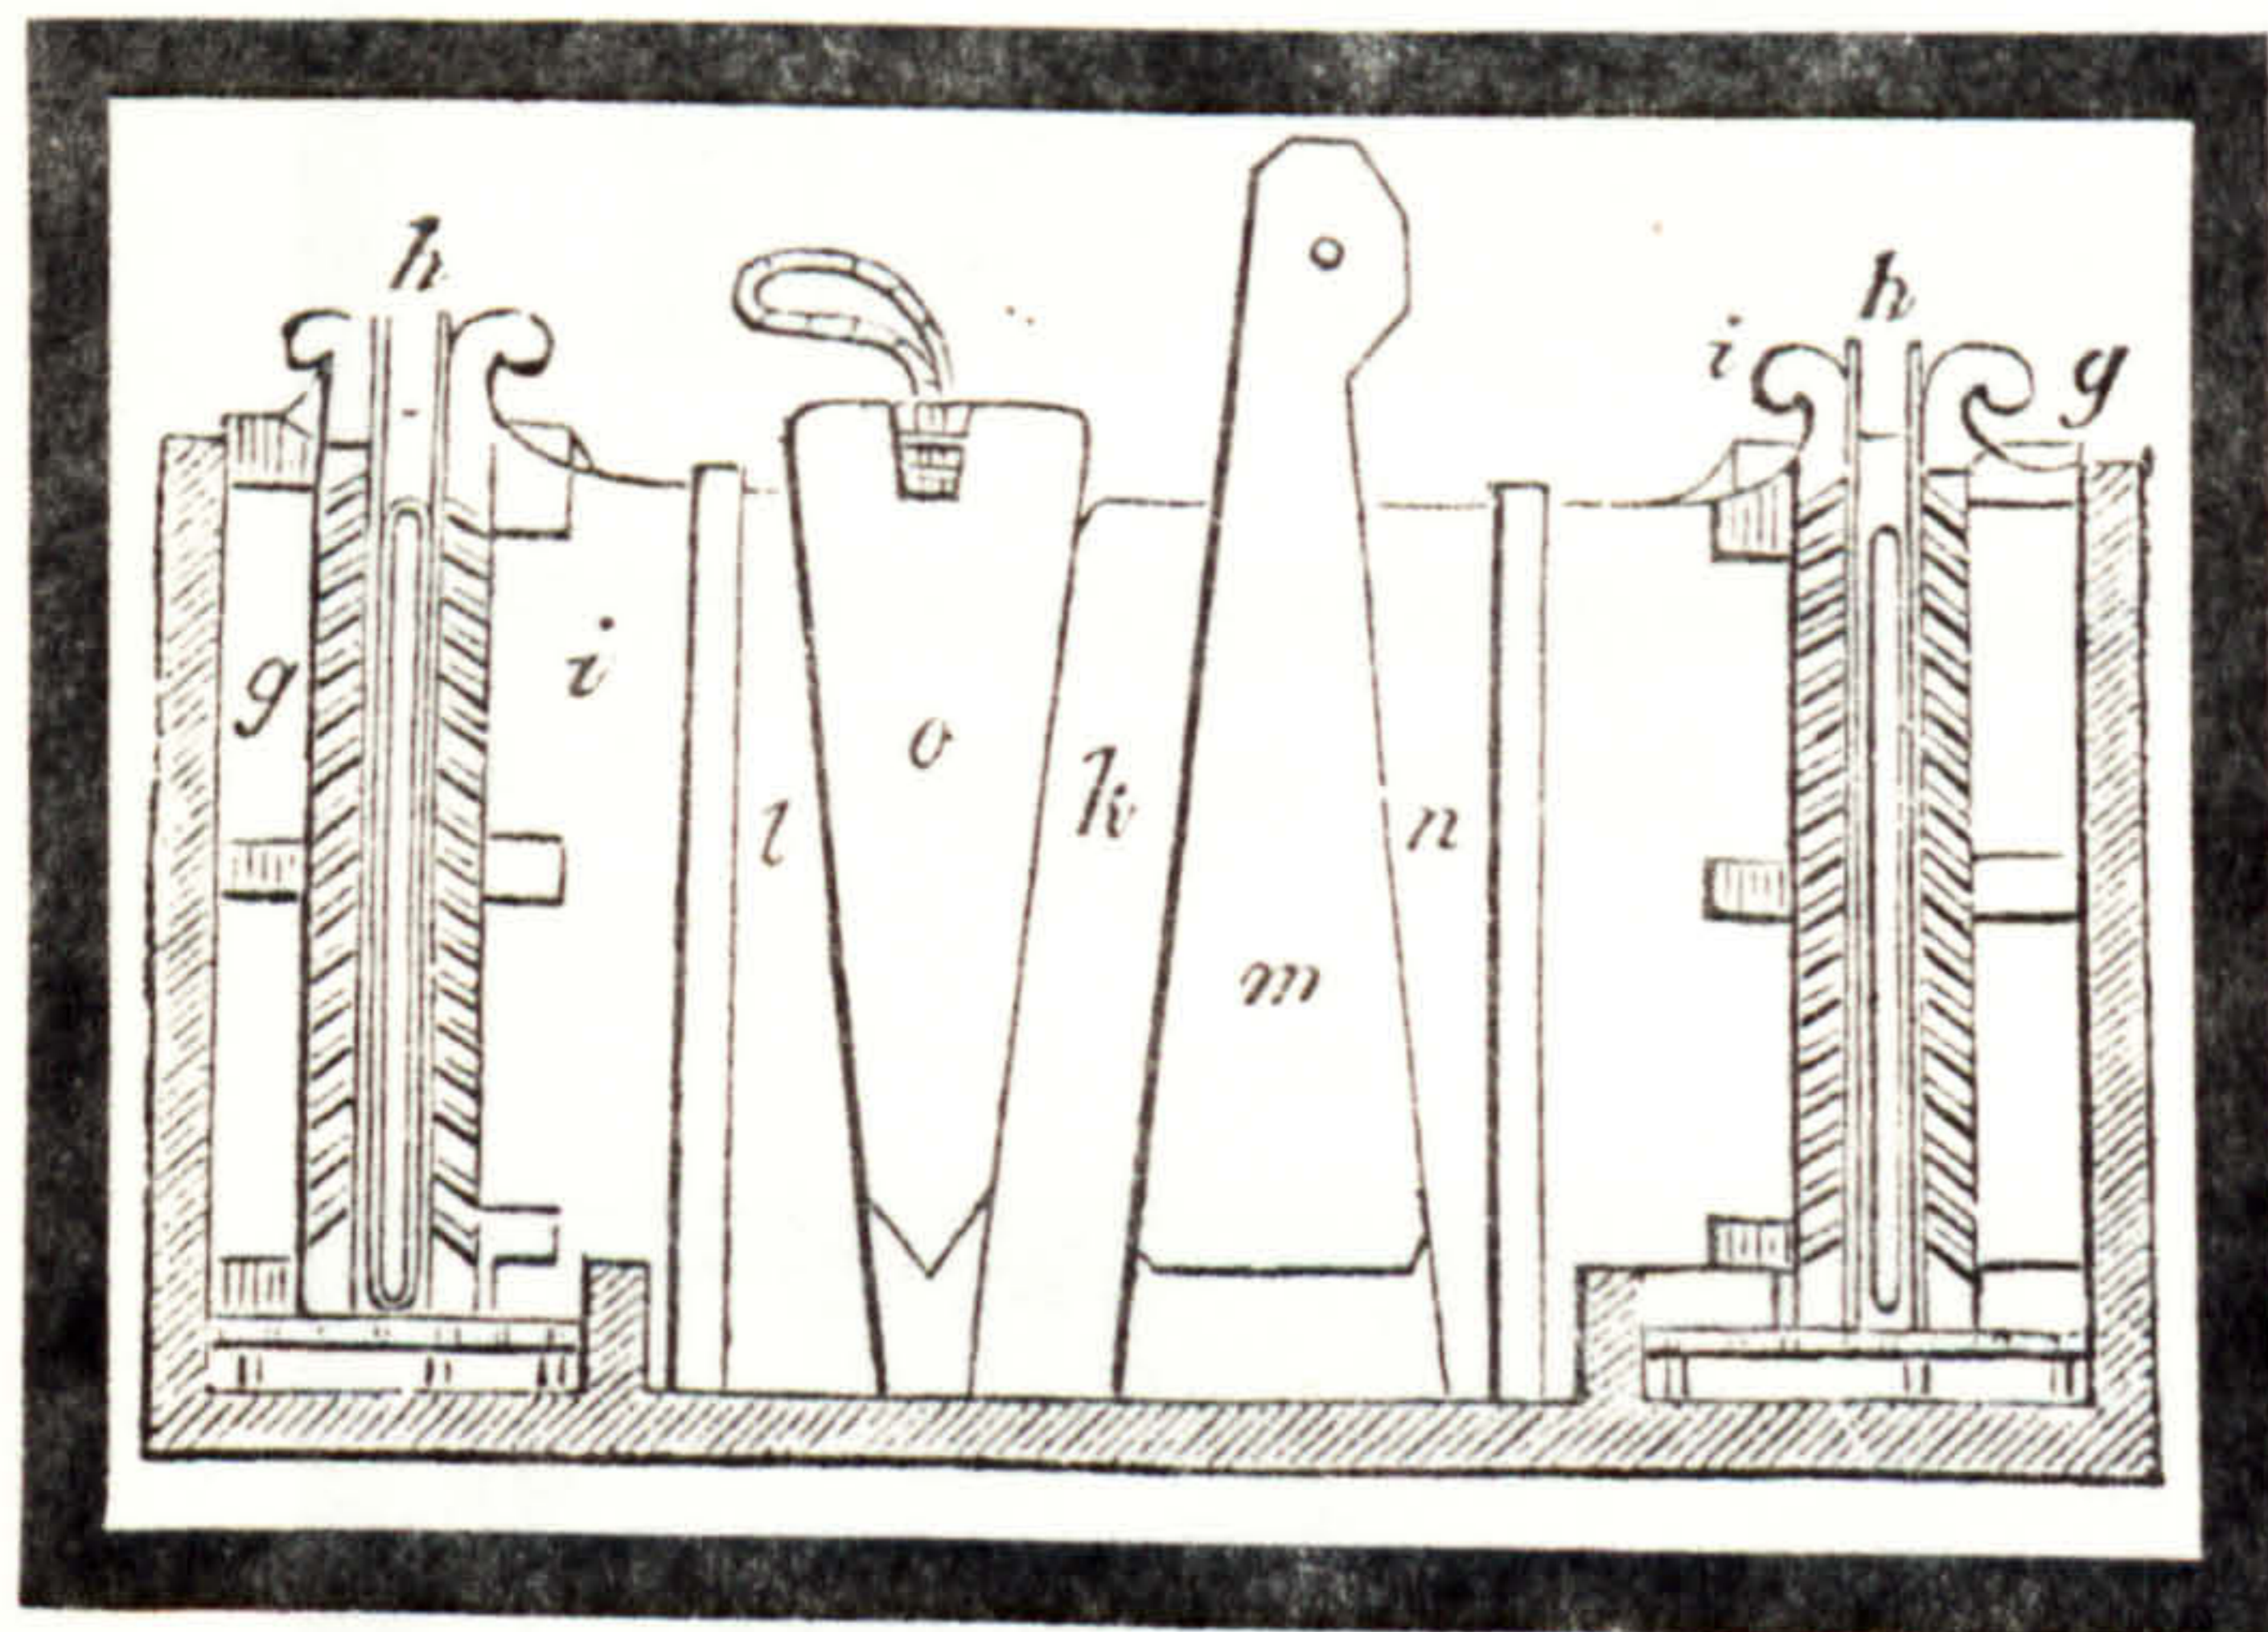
SECTION OF DUTCH MILL PRESS BOX
